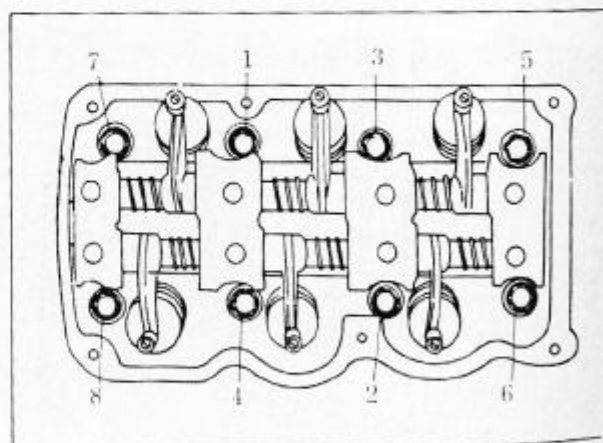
A - 74 TIGHTENING SEQUENCE FOR CYLINDER HEAD BOLTS
